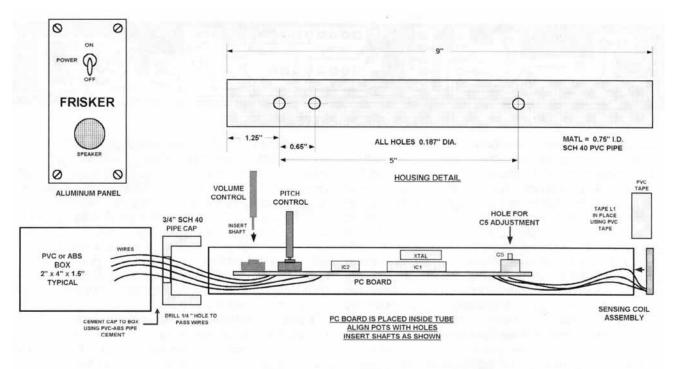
PARTS PLACEMENT AND LAYOUT COMPONENT SIDE VIEW
